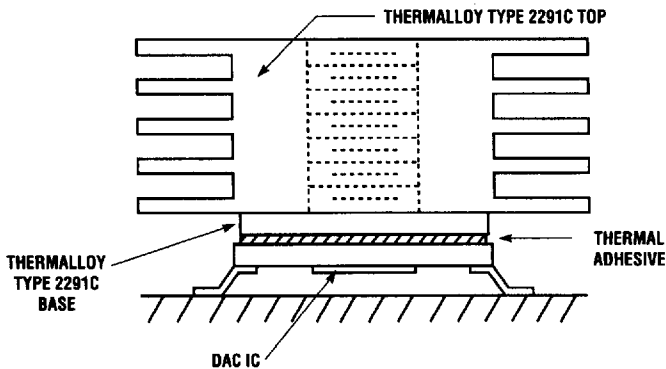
Heat-Sink Mounting Arrangement (heat sink not included)
